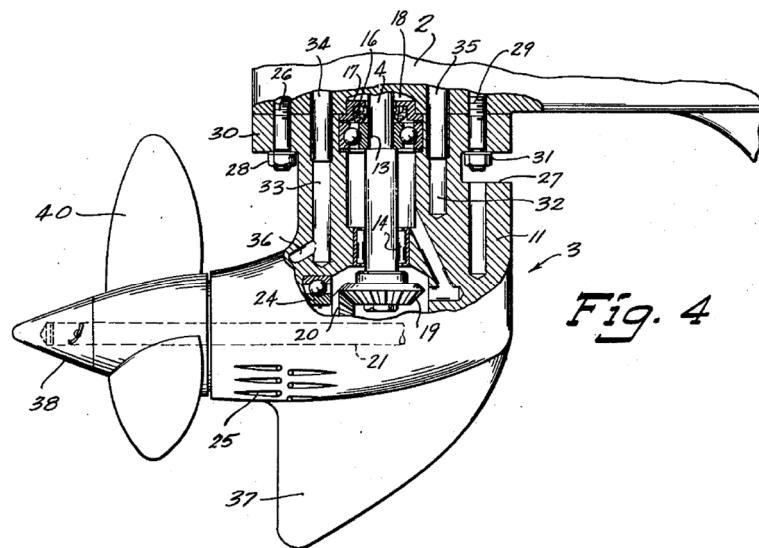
is an enlarged side view of the lower end of the motor shown in Figure 2, sectioned and with certain parts broken away. *See* Ex. 1004, 1:35–36, 1:29–31. As shown, gear 19, carried at the lower end of drive shaft 4, engages gear 20, carried by propeller shaft 21. *See id.* at 2:23–27.
